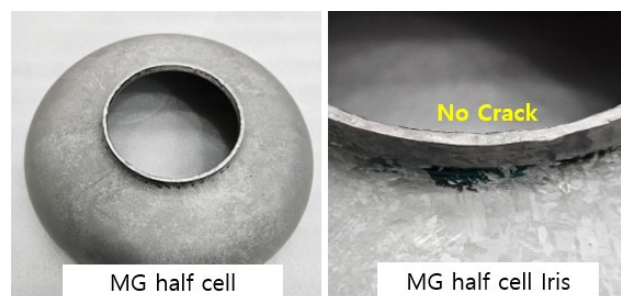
MG half-cell with sheet inner hole enlargement applied.
